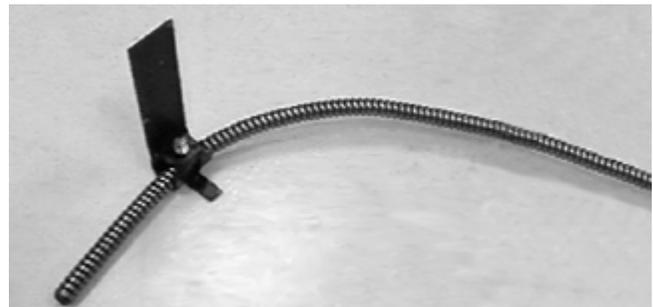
Torque Arm Attached to Cable. Cable Should Be Permanently Bent as Shown with Clamp Installed Approx. 2" From End of Cable
